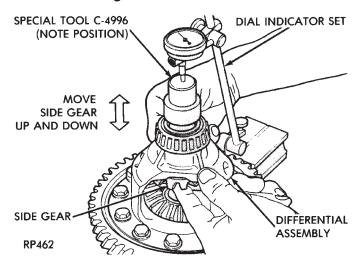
Checking Side Gear End Play CAUTION: Side gear end play must be within .001 to .013 inch.
